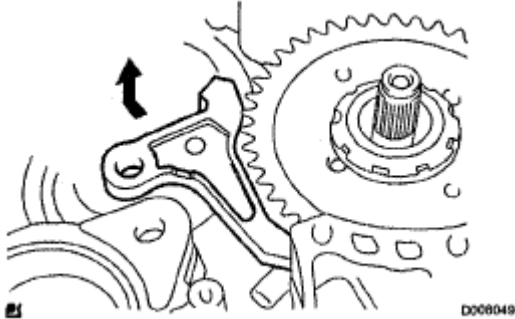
Removing Spring, Pawl Pin And Parking Lock Pawl
